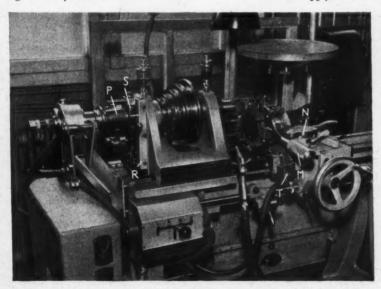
Close-up view of the RB 34 lathe showing the arrangement of the turret tools and the equipment for thread-chasing operations, which are carried out under the control of the threaded, hardened steel bush *P
